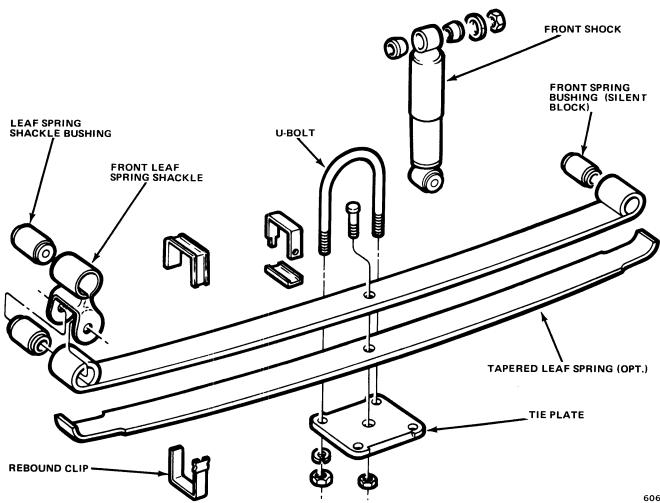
Optional Heavy-Duty Front Spring—Cherokee-Wagoneer-Truck
